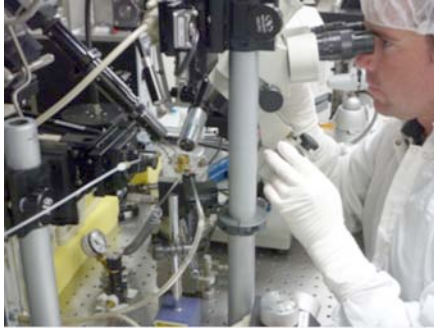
Precision assembly in progress to fabricate a Capsule Fill Tube Assembly (CFTA).
